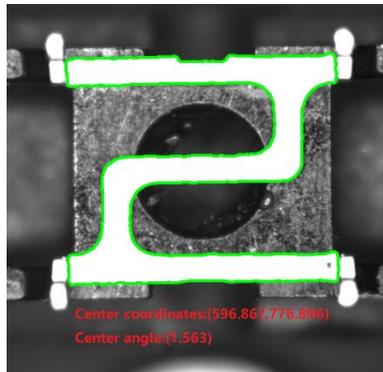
Matching results show Fig. 8 Calipers of straight line inspection
